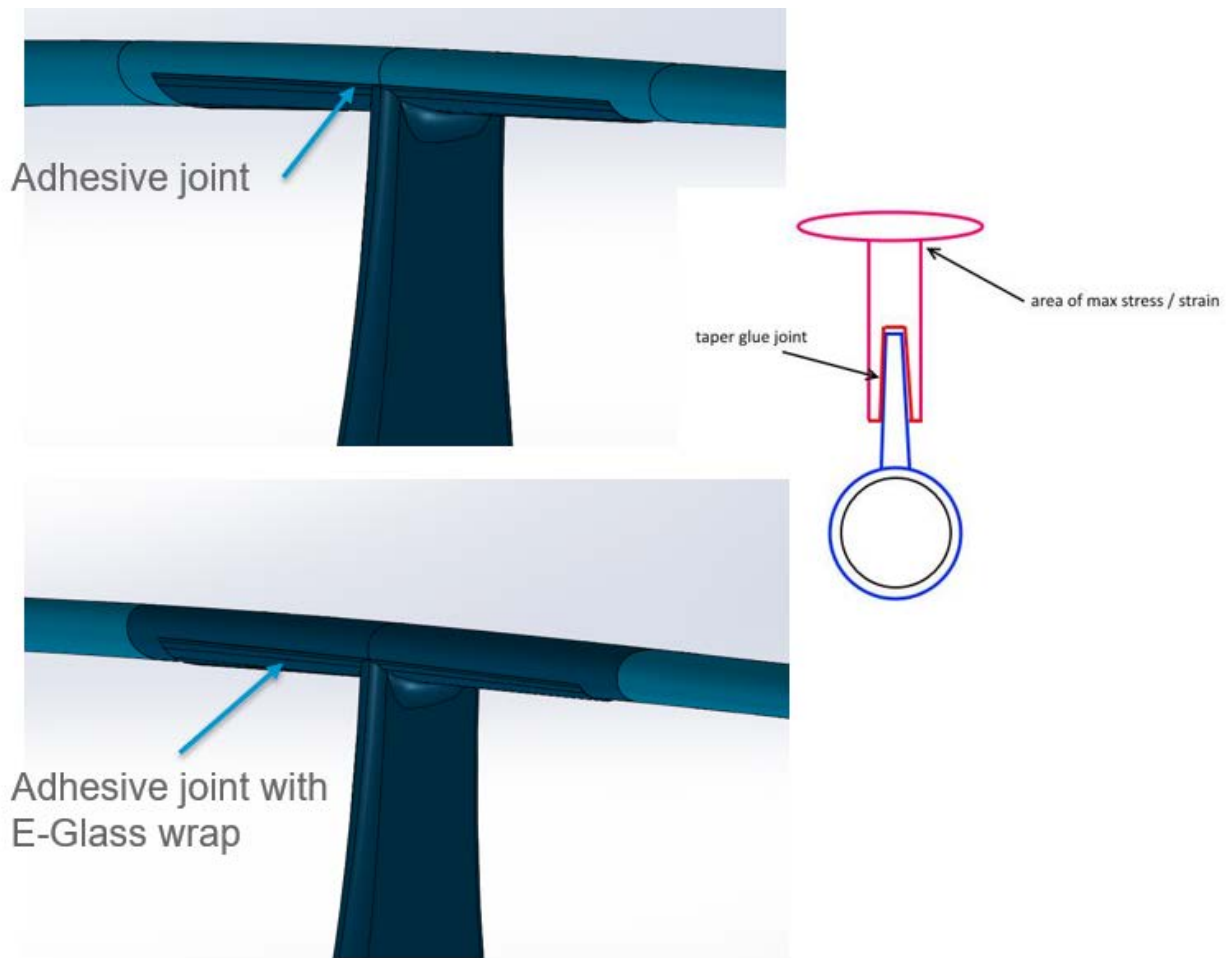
Potential bonded joints between foil and strut. Joint testing would be performed by the manufacturer to verify predicted structural properties prior to the first turbine build.
